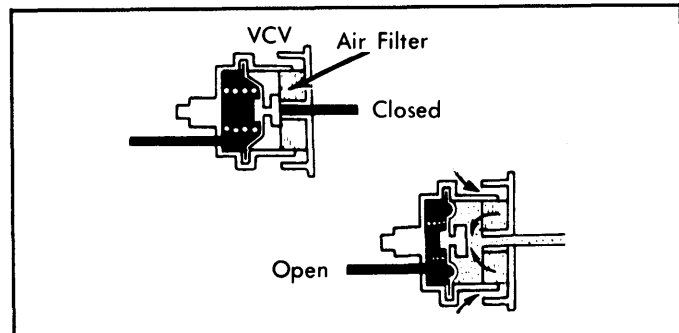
Testing Vacuum Control Valve (Corolla 3K-C)
